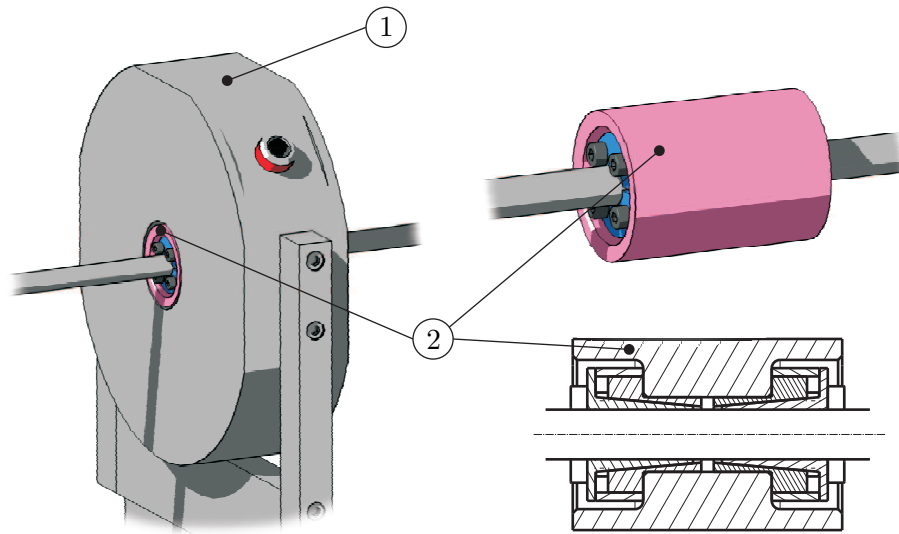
Detailed drawing of the magnetic bearing; 1: magnetic bearing; 2: ferromagnetic disk
